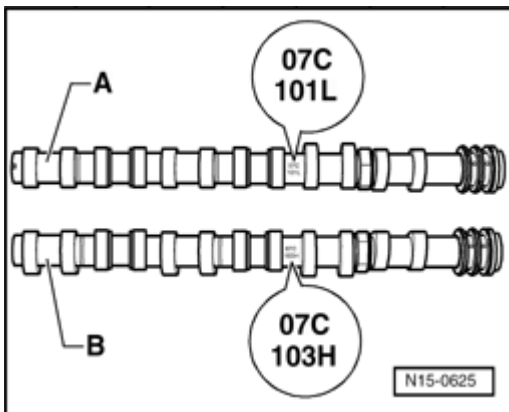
Camshaft Identification Cylinder Bank 2 (Left)
